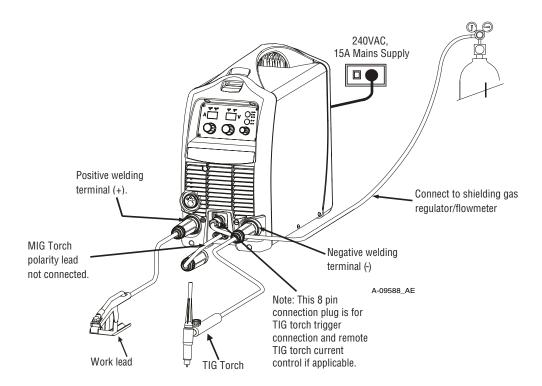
Setup for Lift TIG (GTAW) Welding
